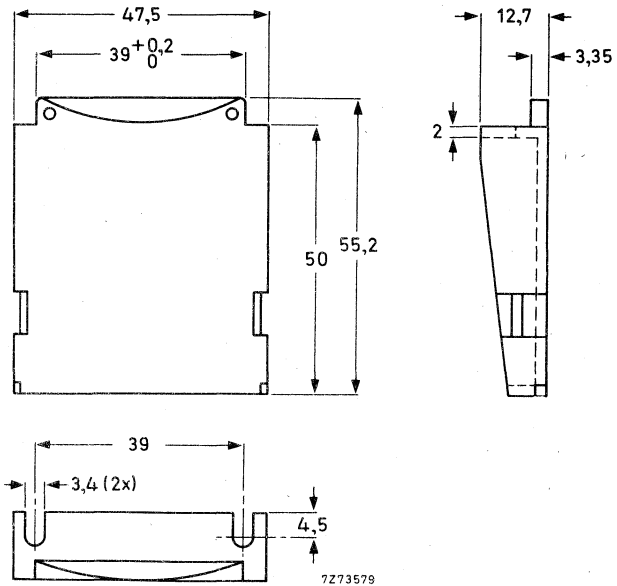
Female end-piece, T version, for mounting with screws to the panel.
